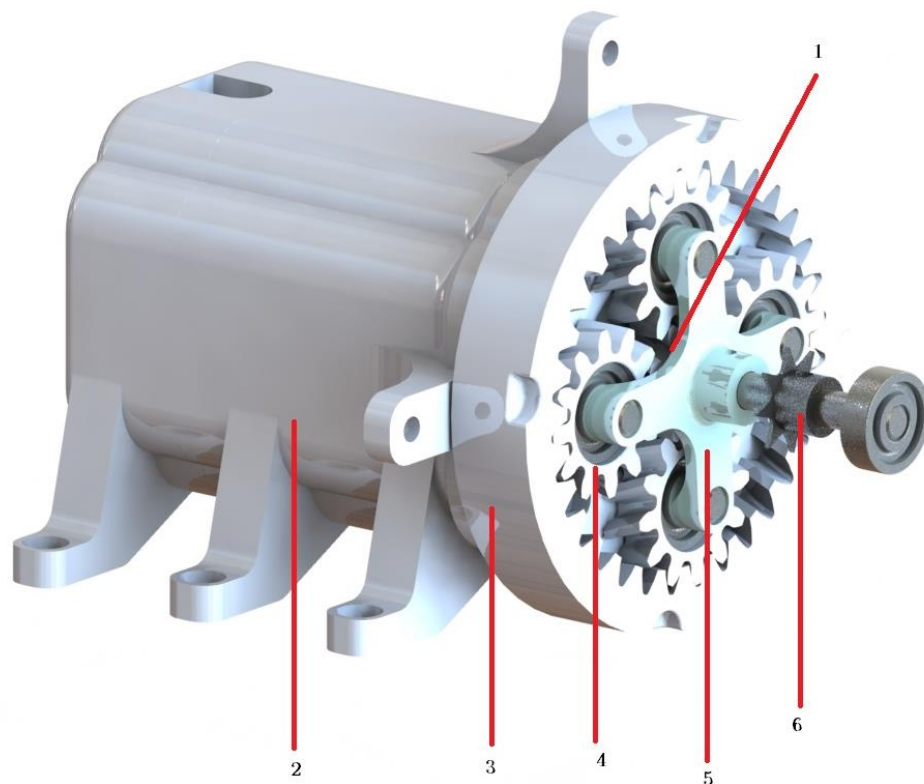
Designed gearbox and motor housing 1) Sun gear (8 teeth), 2) Motor housing, 3) Annulus (32 teeth), 4) Planet gear (12 teeth), 5) Carrier connection to the output shaft, 6) Pinion.
